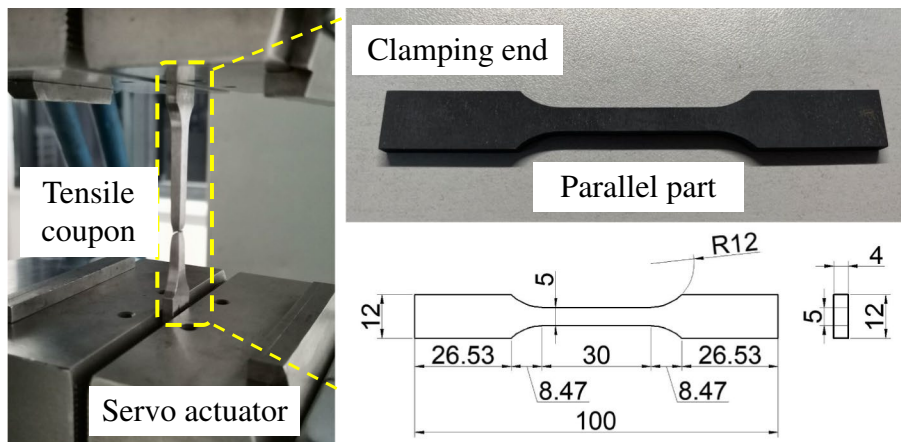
Geometry of the Fe-SMA tensile-test coupon and test set-up
